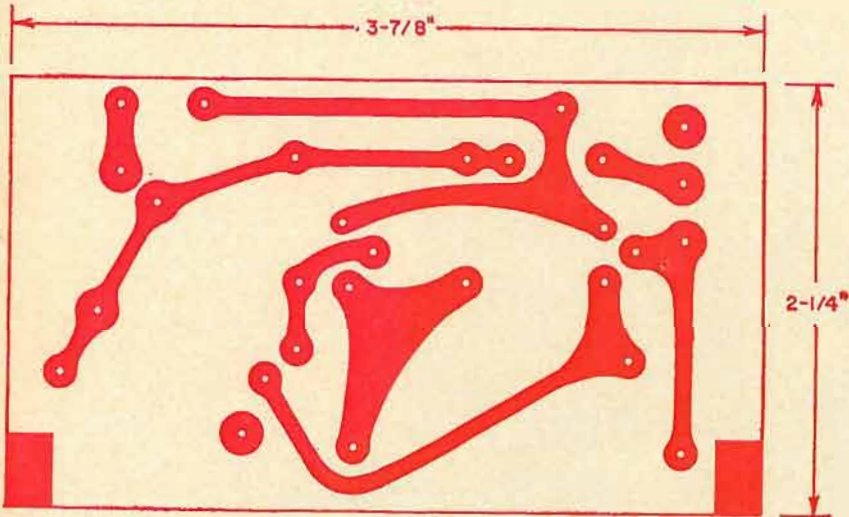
You can use this actual-size drawing to make your own printed-circuit board.
